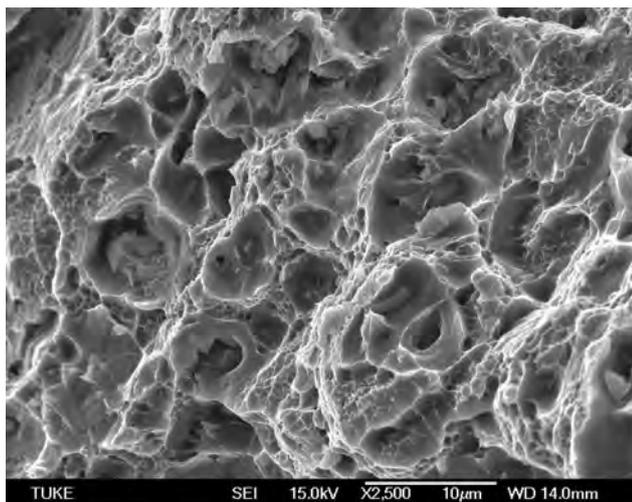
Detail of the fracture surface of EN AW 6012 in the initial state.
